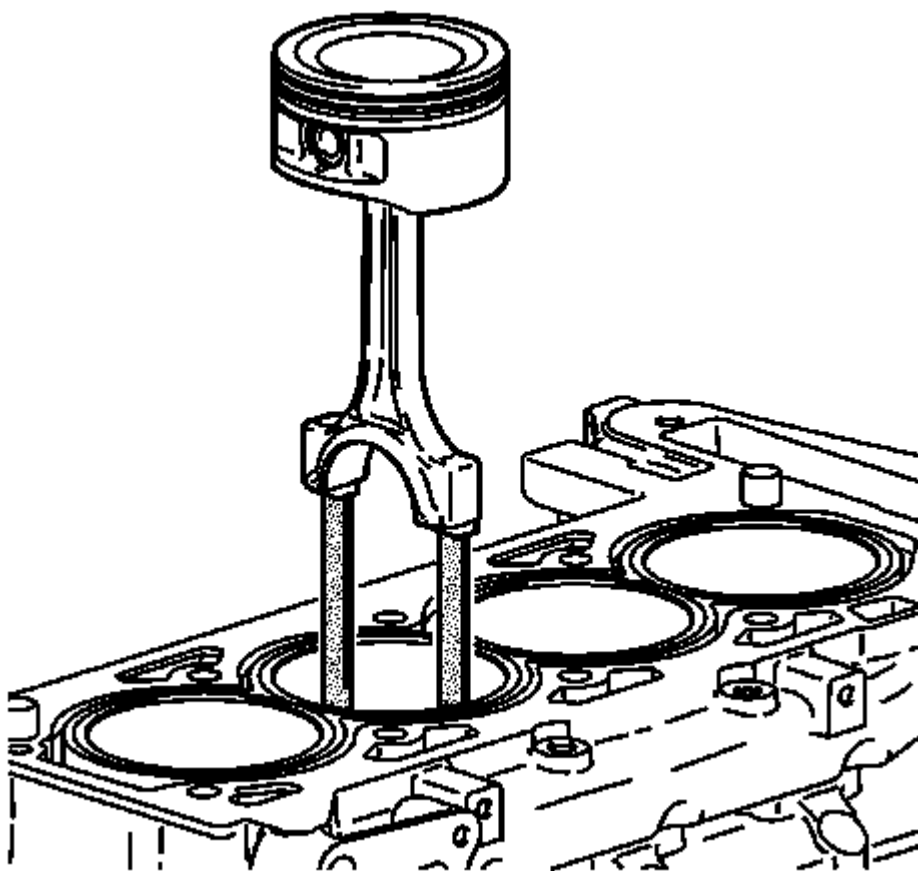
View Of Special Tool J-43966-1 Installed In Connecting Rod Bolt Holes
